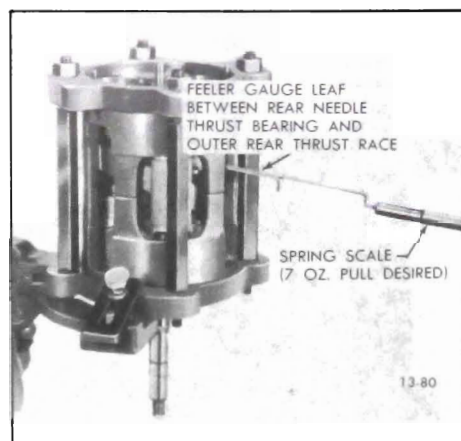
Checking "Drag" on Selected Feeler Gage Leaf with Spring Scale
